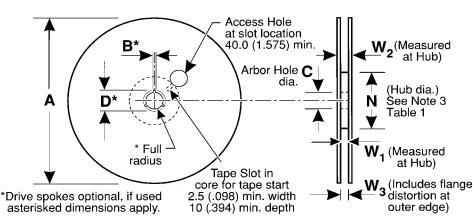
Reel Dimensions (Metric Dimensions will govern)
